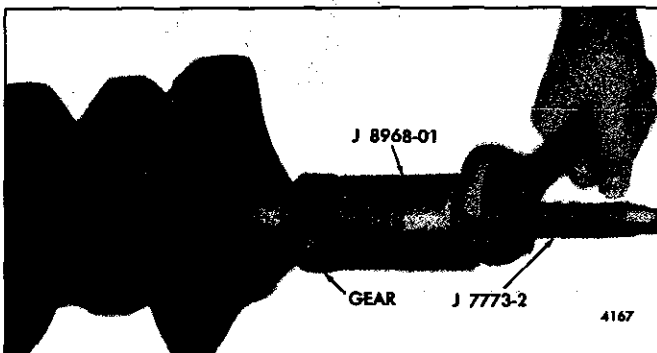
Installing Oil Pump Drive Gear Using Tools J 8968-01 and J 7773-2
